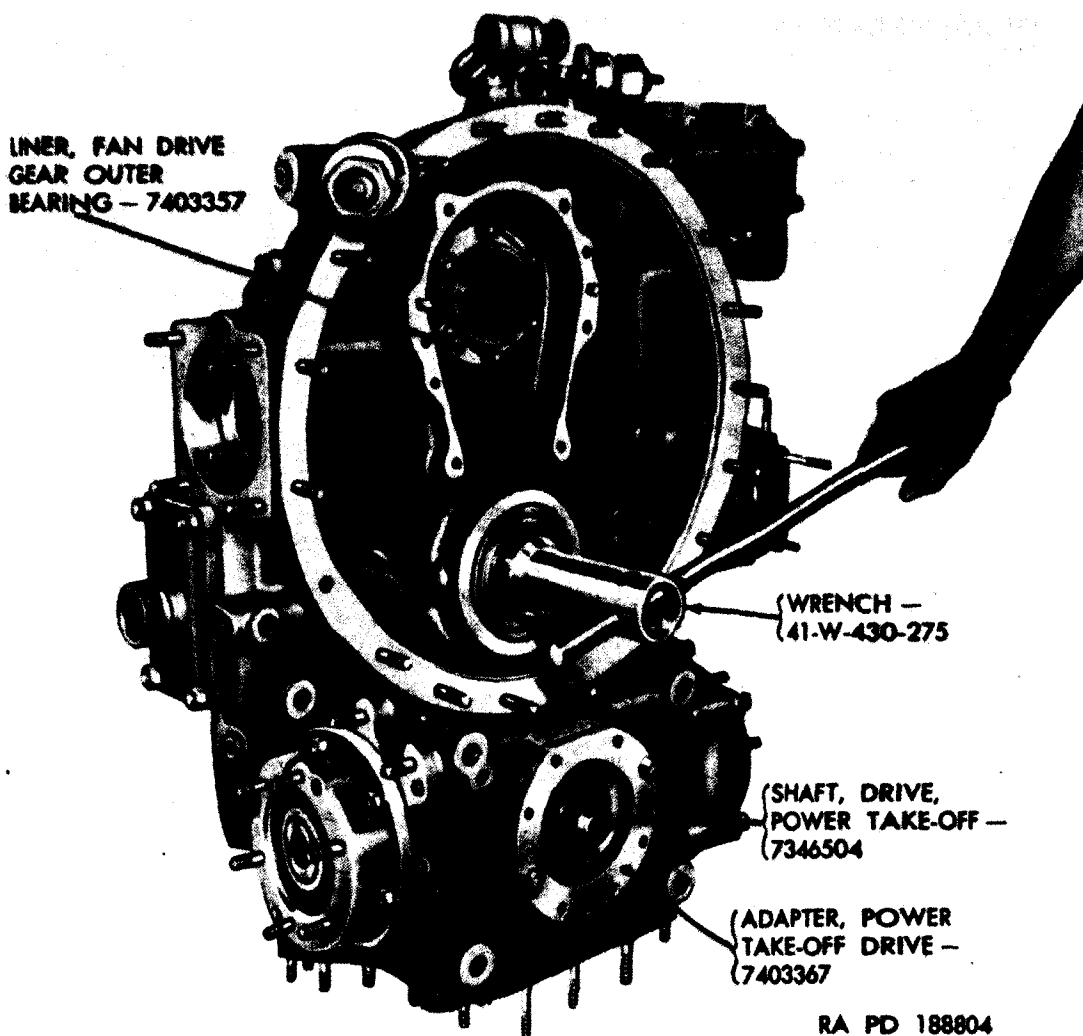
Tightening accessory drive shaft bearing retaining nut.
